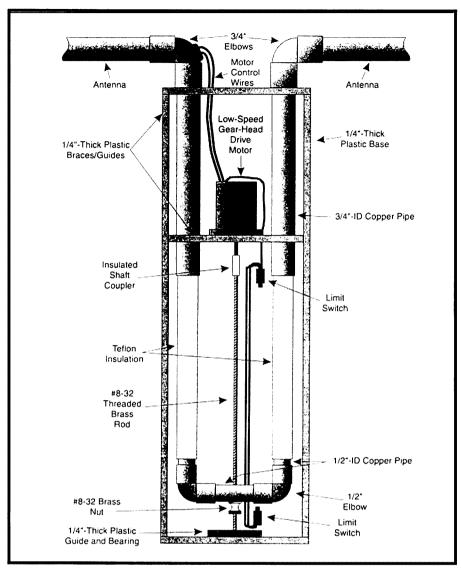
Mechanical drawing of KD7S Loop Tuning Capacitor.
